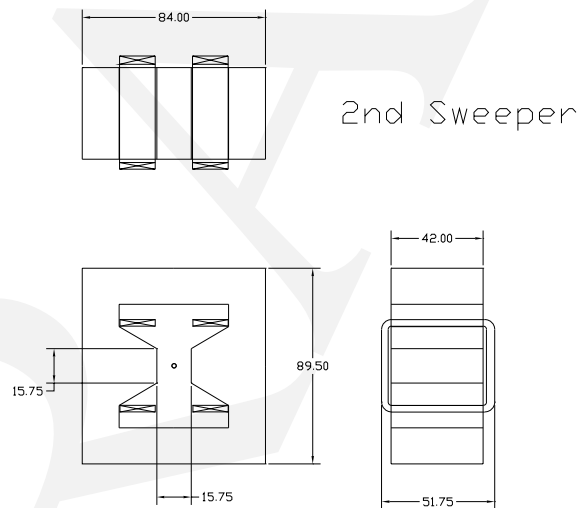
Configuration of 2nd sweeper magnet. Dimensions are given in inches.
